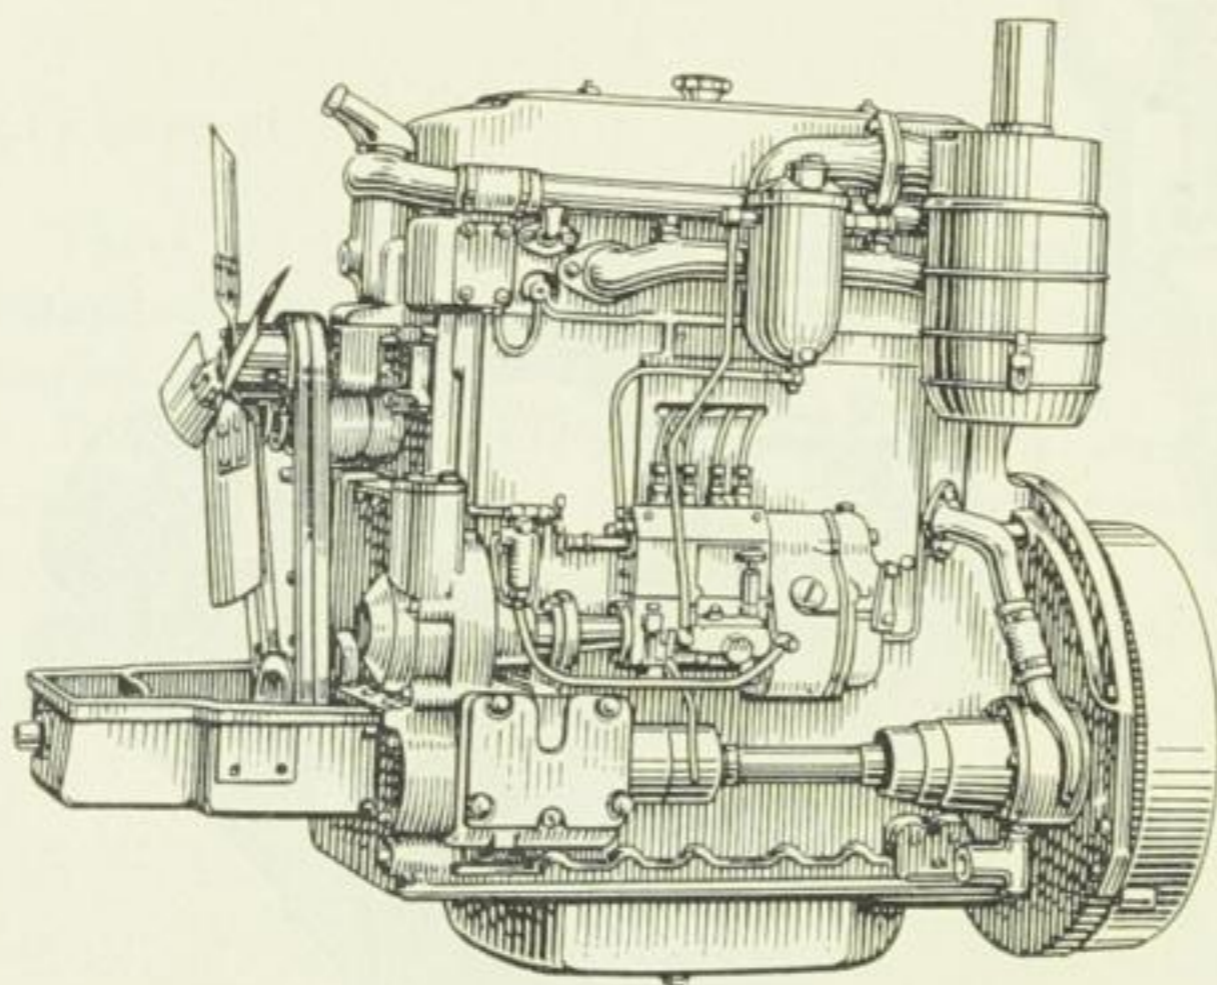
Four-stroke in-line engine (Diesel engine)
